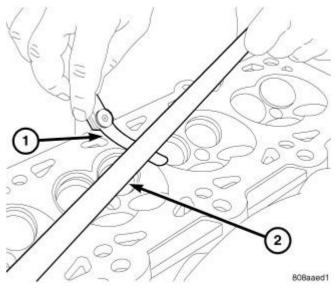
Checking Cylinder Head Flatness Courtesy of CHRYSLER GROUP, LLC
